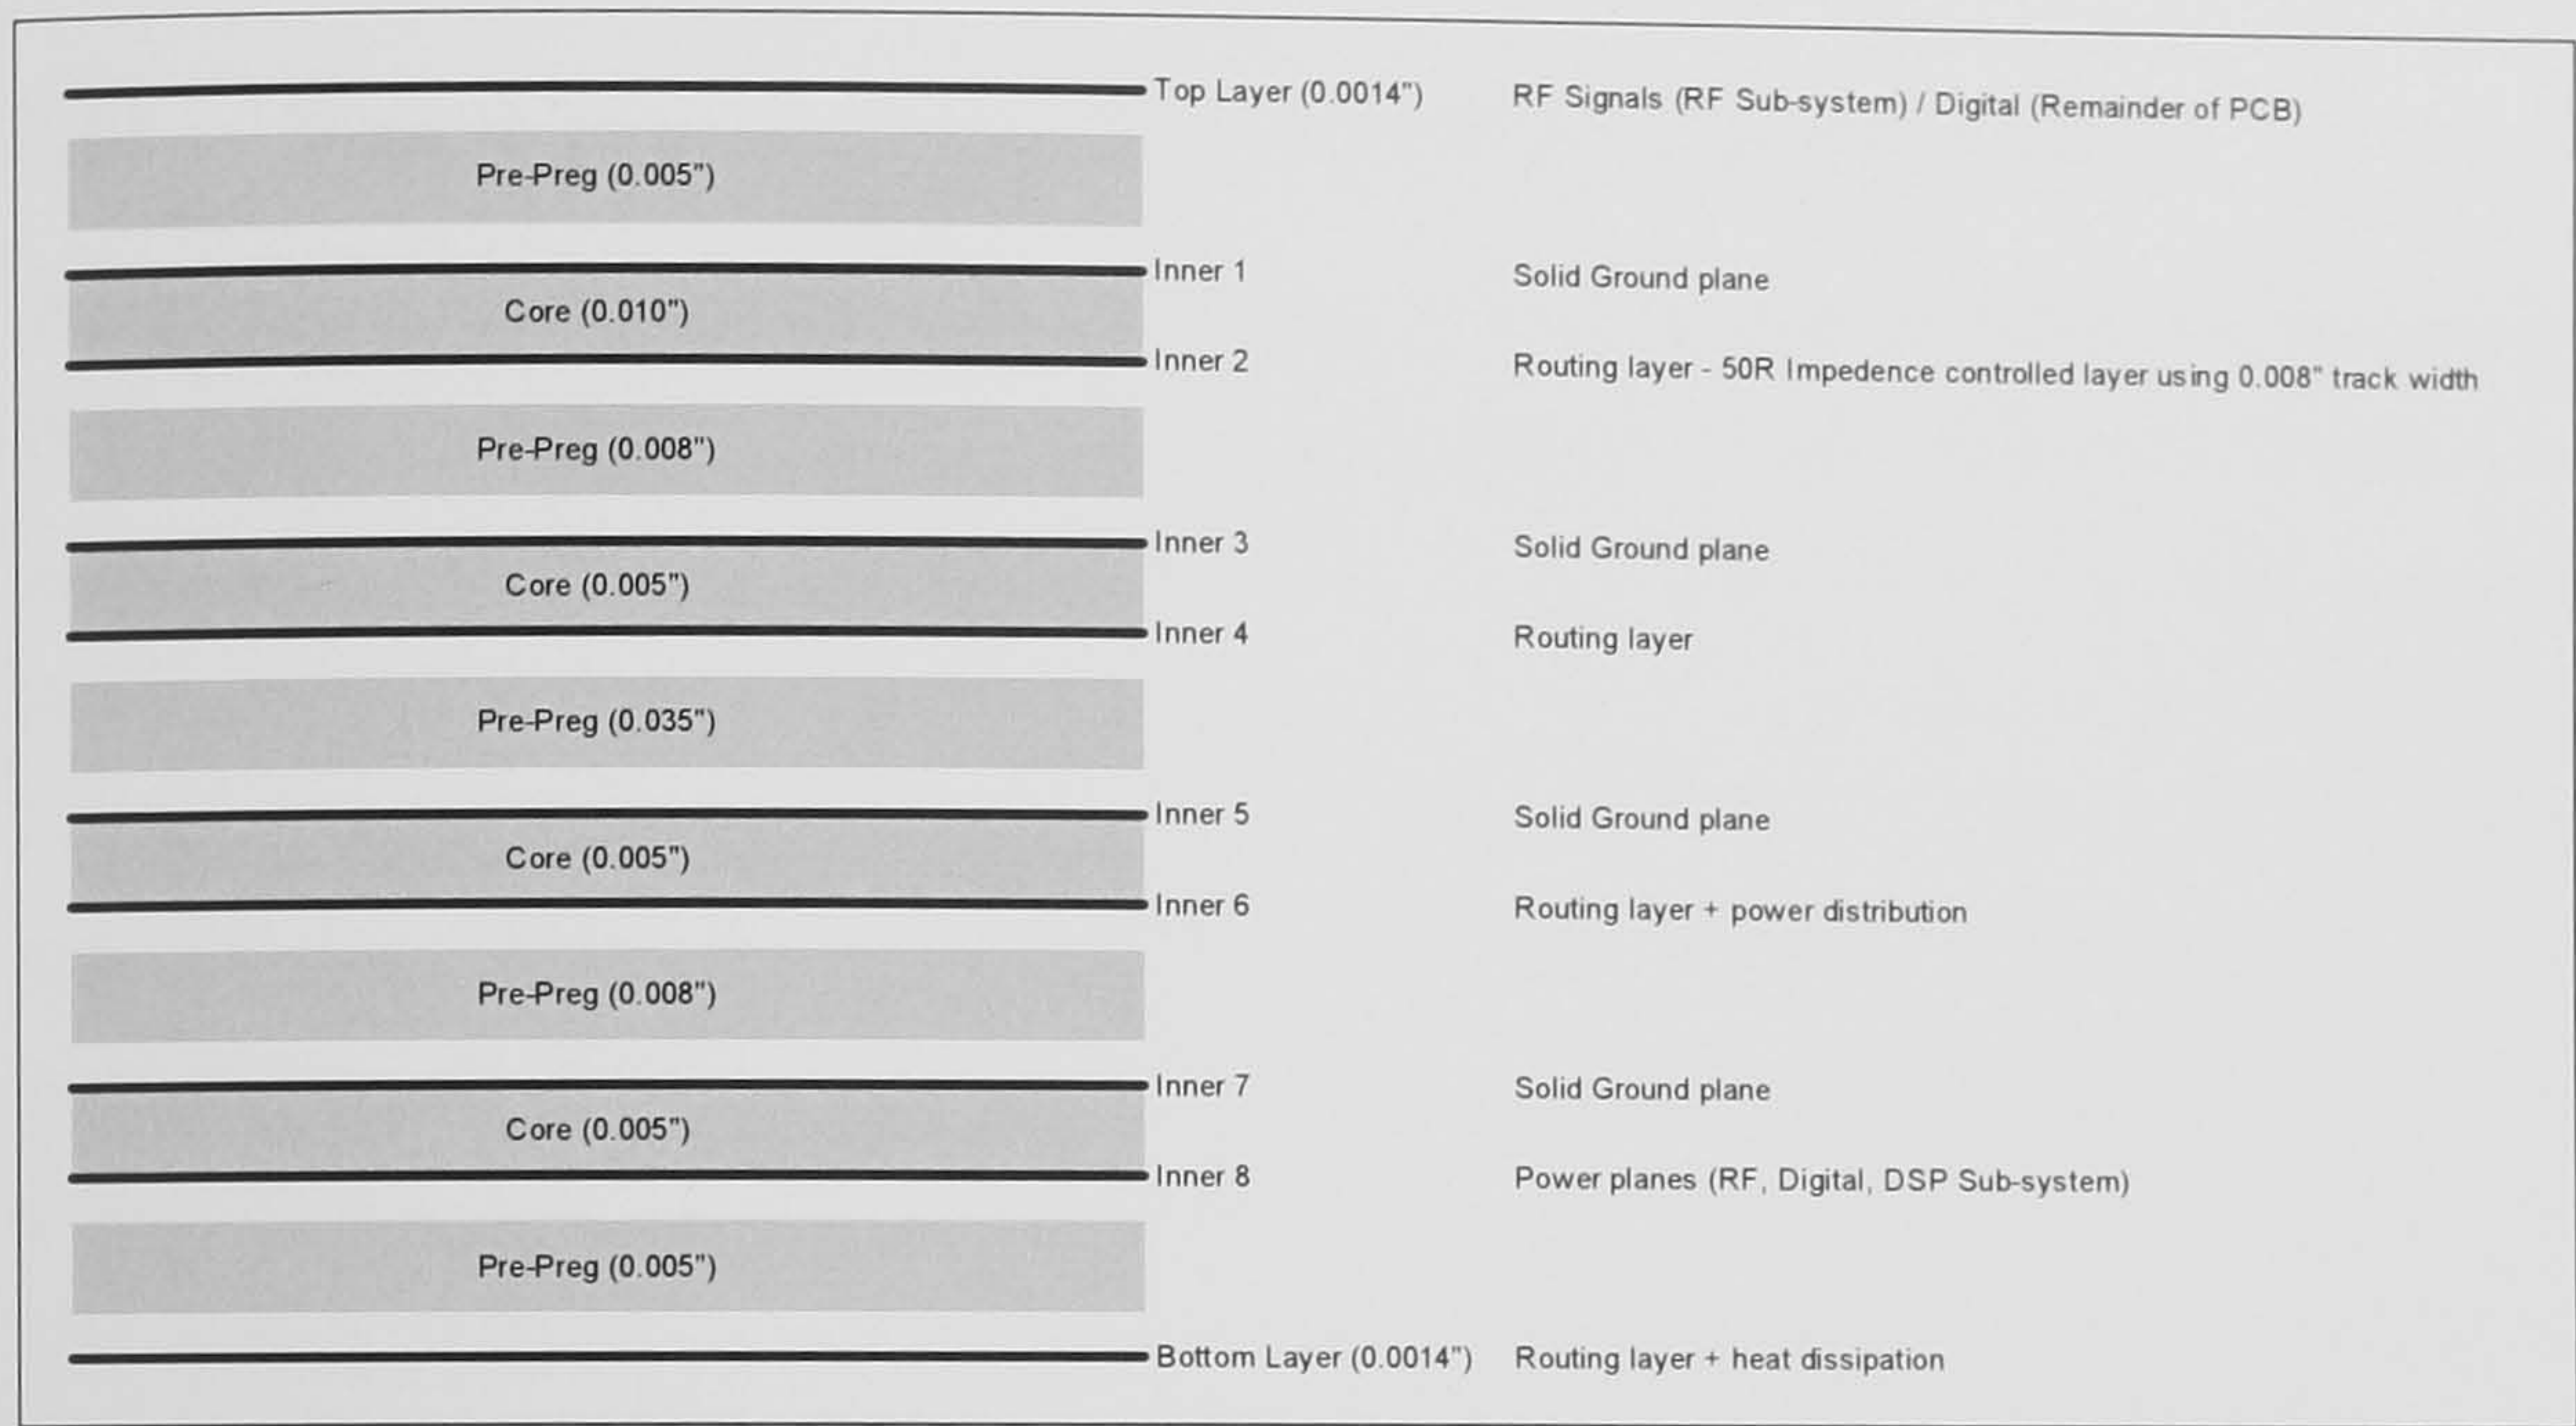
Digital Transceiver PCB ‘Stack-up’ (0.062”±0.008 Finished Thickness)
